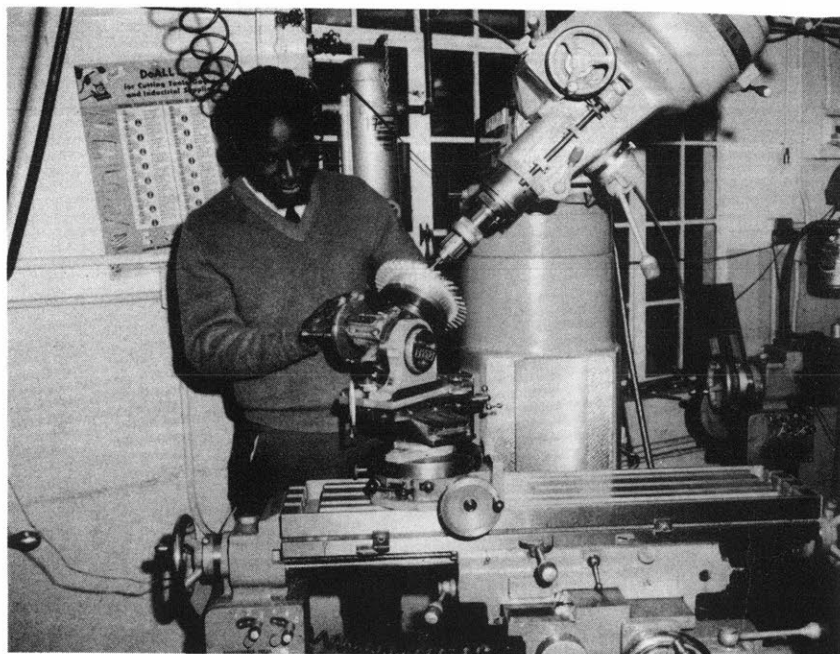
SET-UP FOR ROTOR CONSTRUCTION
